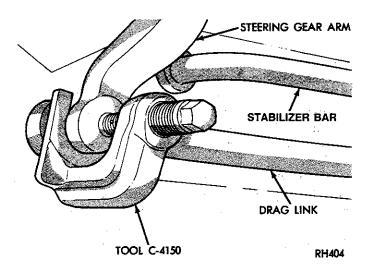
Drag-Link Ball Stud Removal With Tool C-4150
